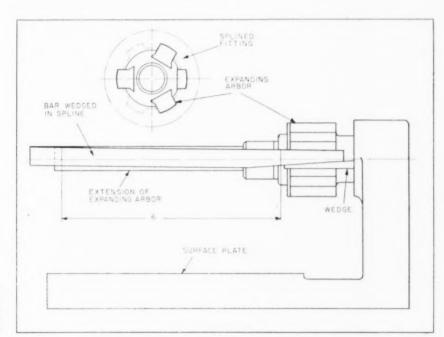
To check the condition of alignment specified in the note on Fig. 7, testing equipment of the type shown may be used.
